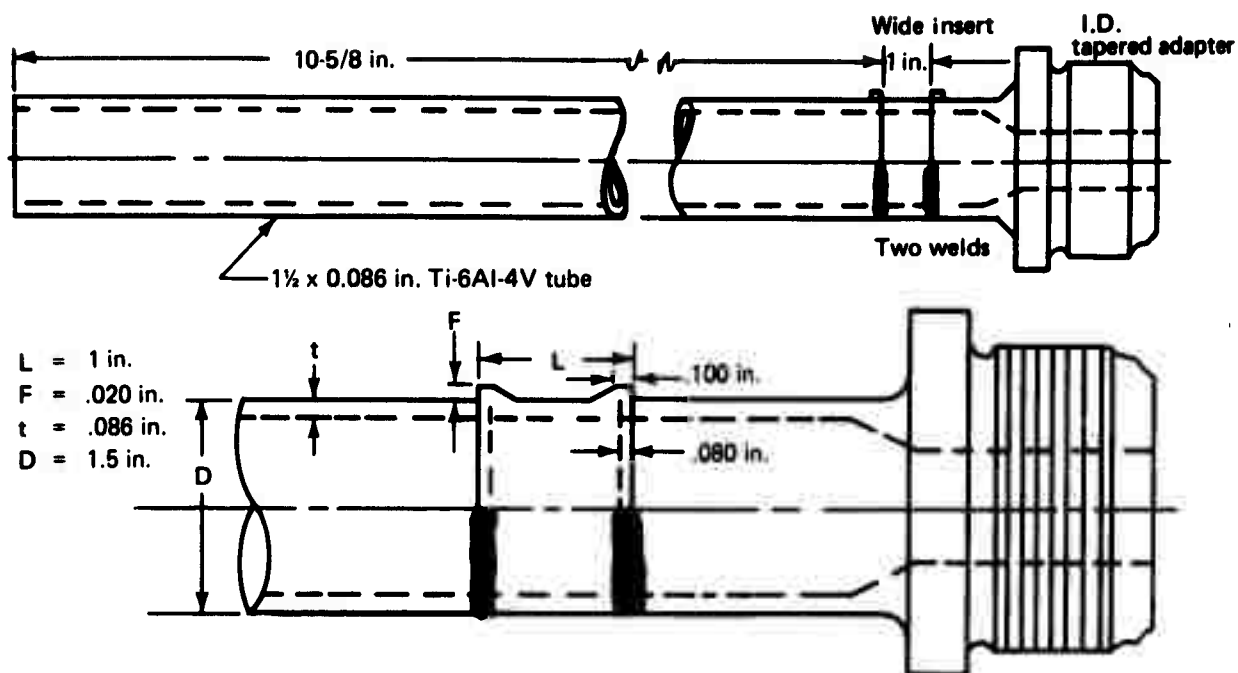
SPECIMEN AND JOINT CONFIGURATION FOR FATIGUE TEST SPECIMENS
